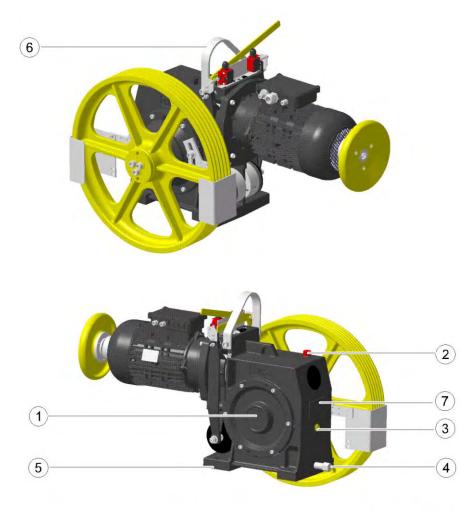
TW63B Machine with motor version V3F (shown is the vertical motor position IMV1 - and brake monitoring - SA3/3.1)
